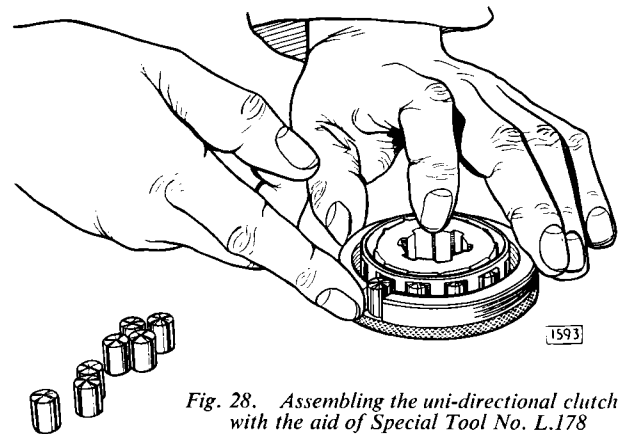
Assembling the uni-directional clutch with the aid of Special Tool No. L.178
